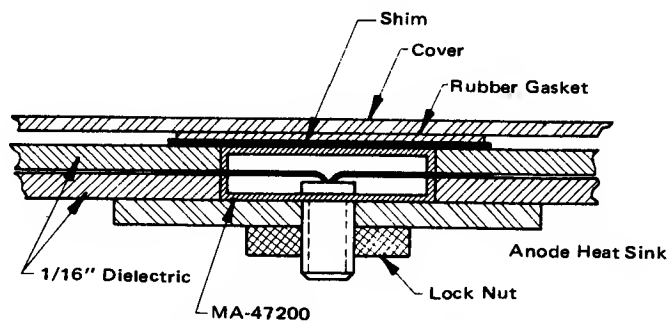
MA-47200 MOUNTING IN 1/8" BALANCED STRIPLINE
